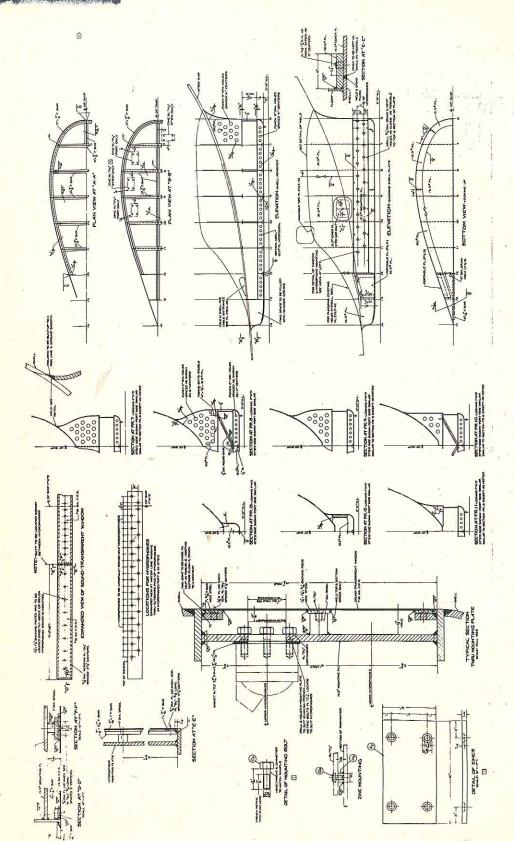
Manufacturer's Drawings of COCHINO Array, Showing Construction Details
